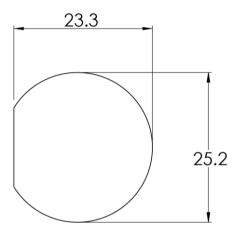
Remote Pendant Patch Board Mounting Hole Dimensions (mm)
